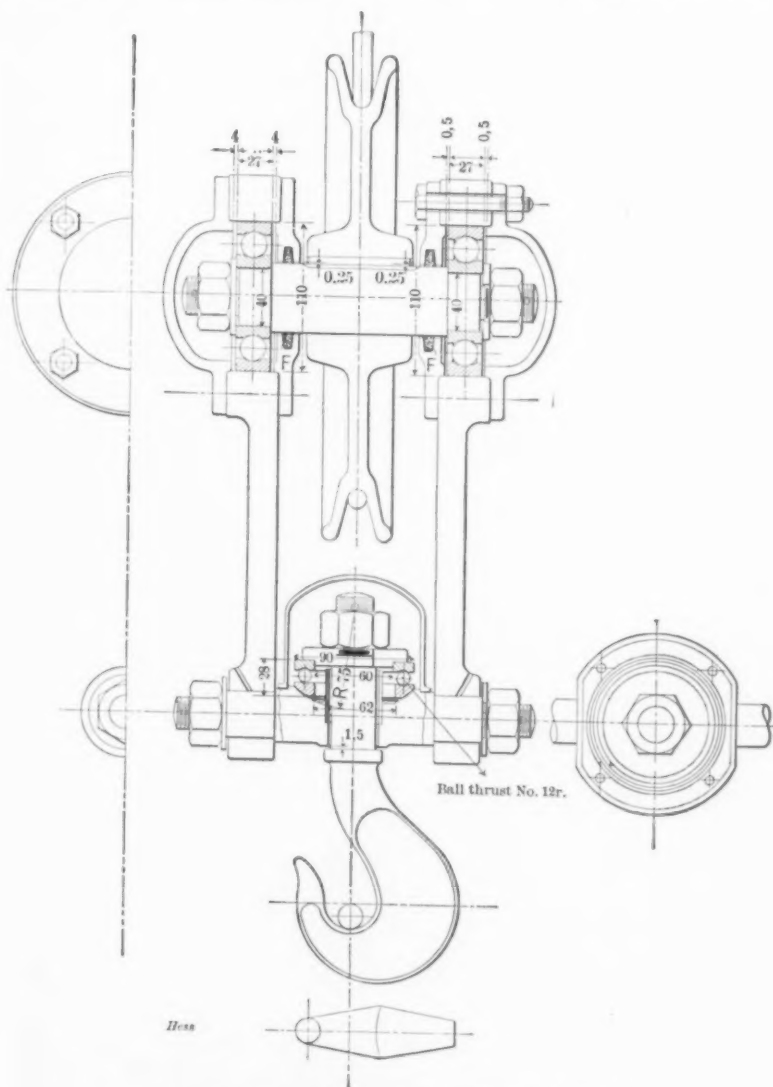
LOWER CRANE SHEAVE AND HOOK.
